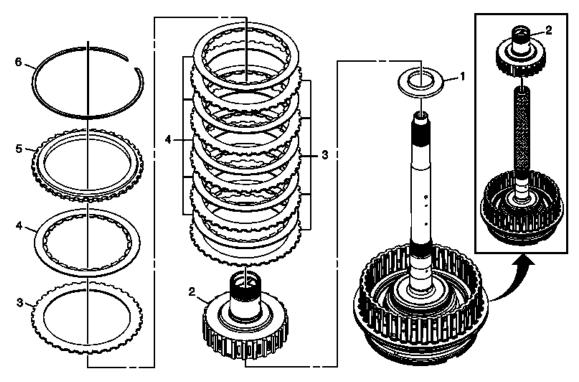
View Of 4-5-6 Clutch Dam Courtesy of GENERAL MOTORS COMPANY
